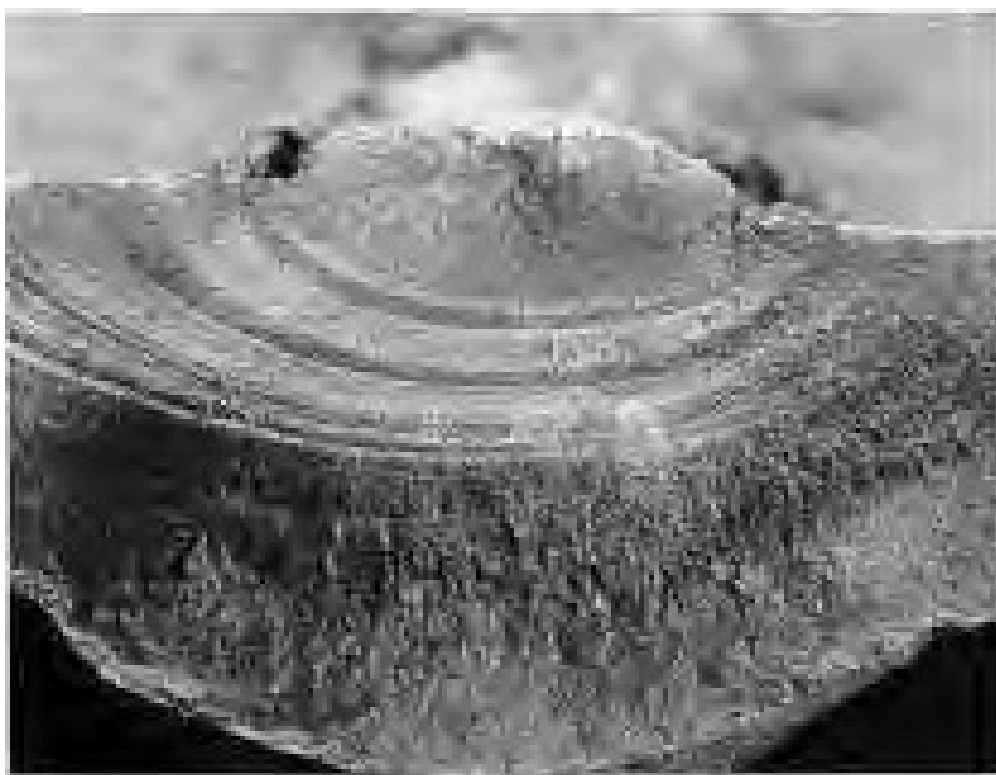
Fatigue fracture surface of a carbon steel pipe.
